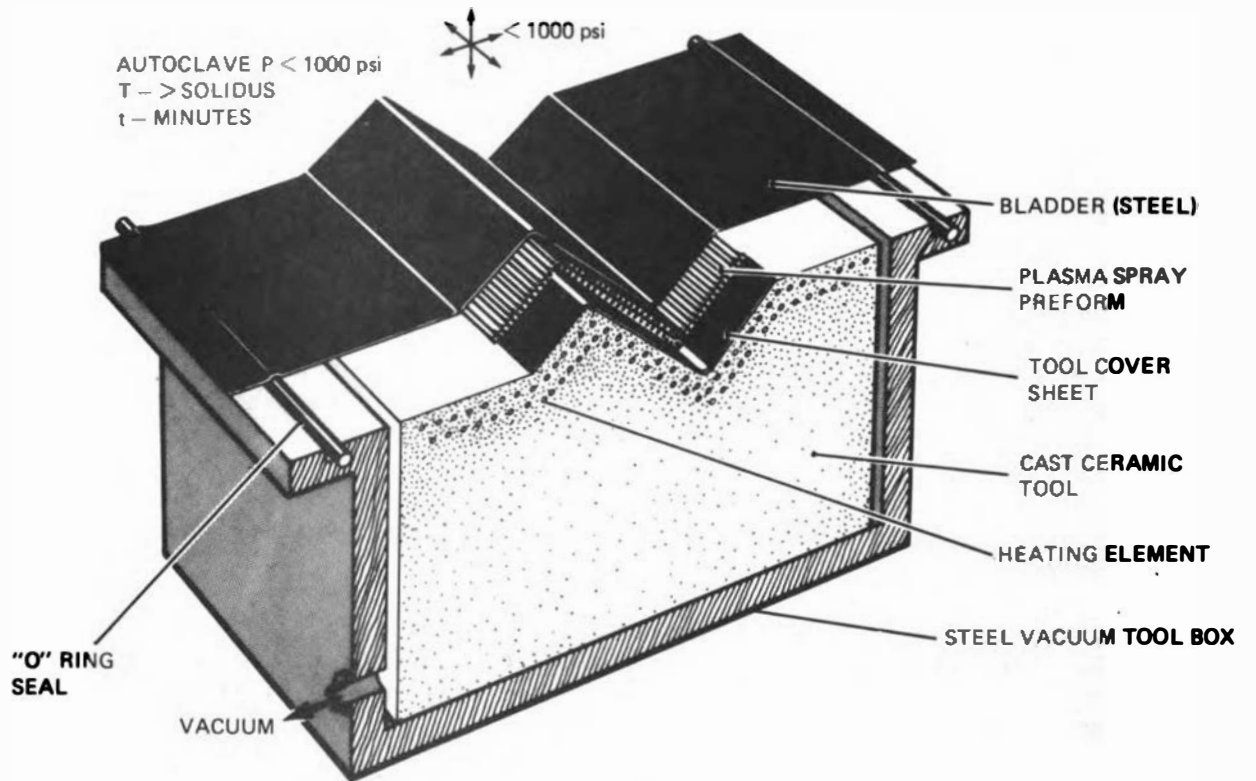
Evacuated tool hot molding (courtesy of AVCO Corporation).
